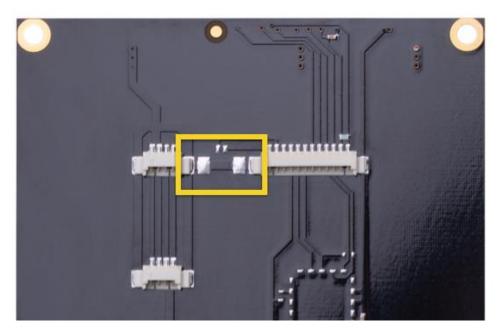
Solar Panel - Bottom Side (location of pads for the external magnetorquer connector)
